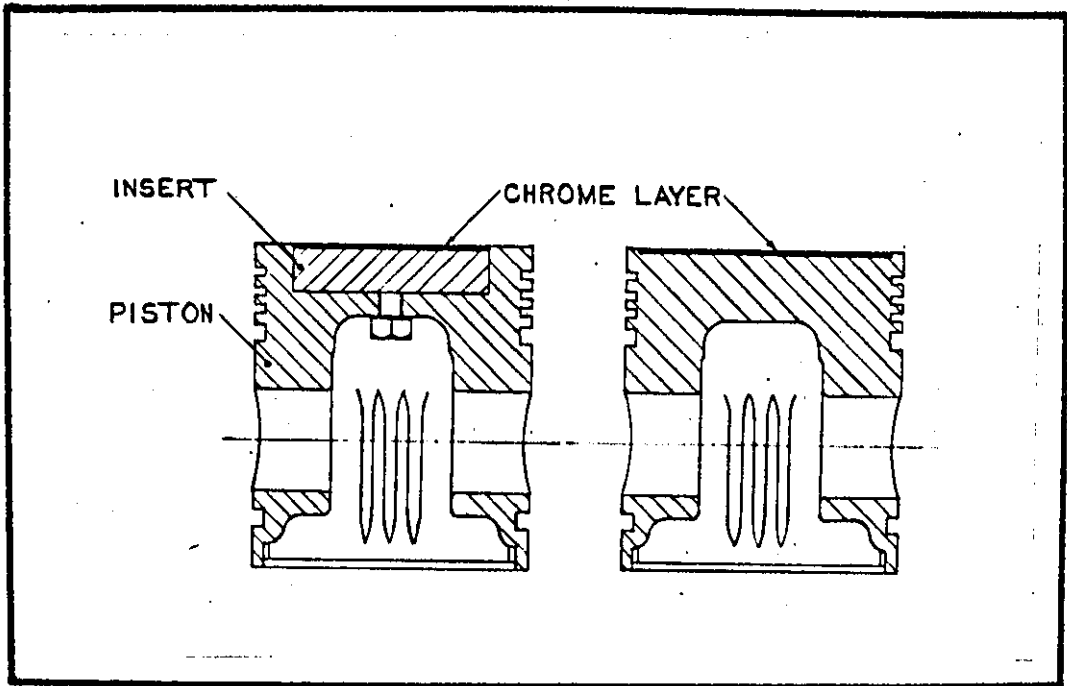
Method of mounting piston mirror. Insert method (left) and directly deposited method.
